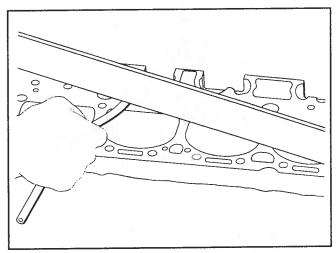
Checking Gasket Surface Of Cylinder Head For Flatness
